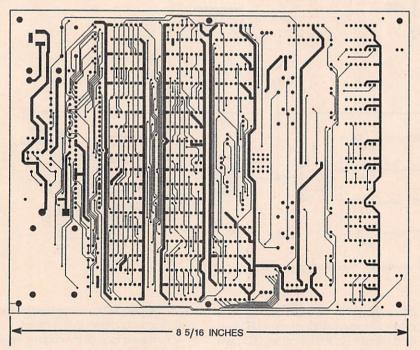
Here's the solder side of the Digital Clock's PC board. Again, it is shown here half-size for space reasons.
